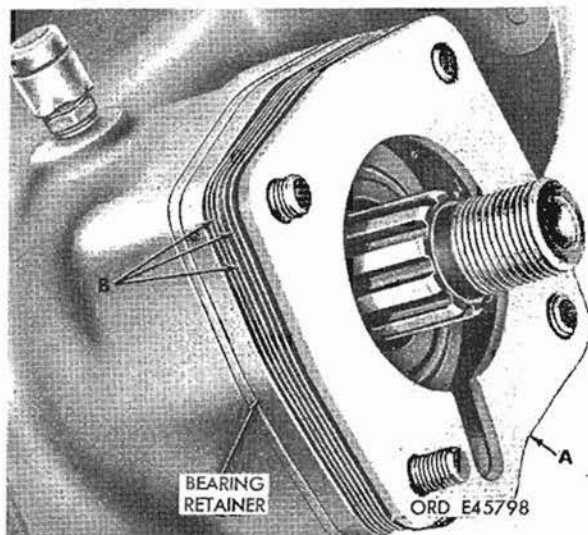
Removing or installing dirt and liquid shield - M274A1, M274A2.
